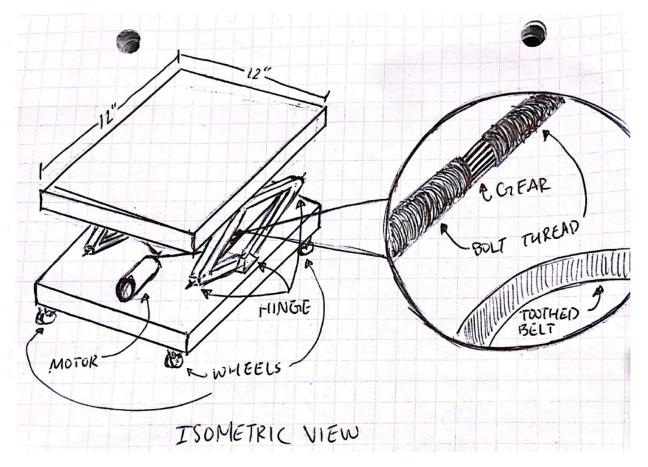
Side view with details of gear and lift mechanism that utilizes thread on the bolt which locks with a toothed belt to create a positive drive (and avoid slippage).
